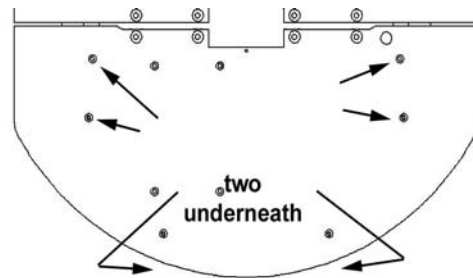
Remove indicated screws to access the front plate of Pioneer 3-DX and -AT robots.
